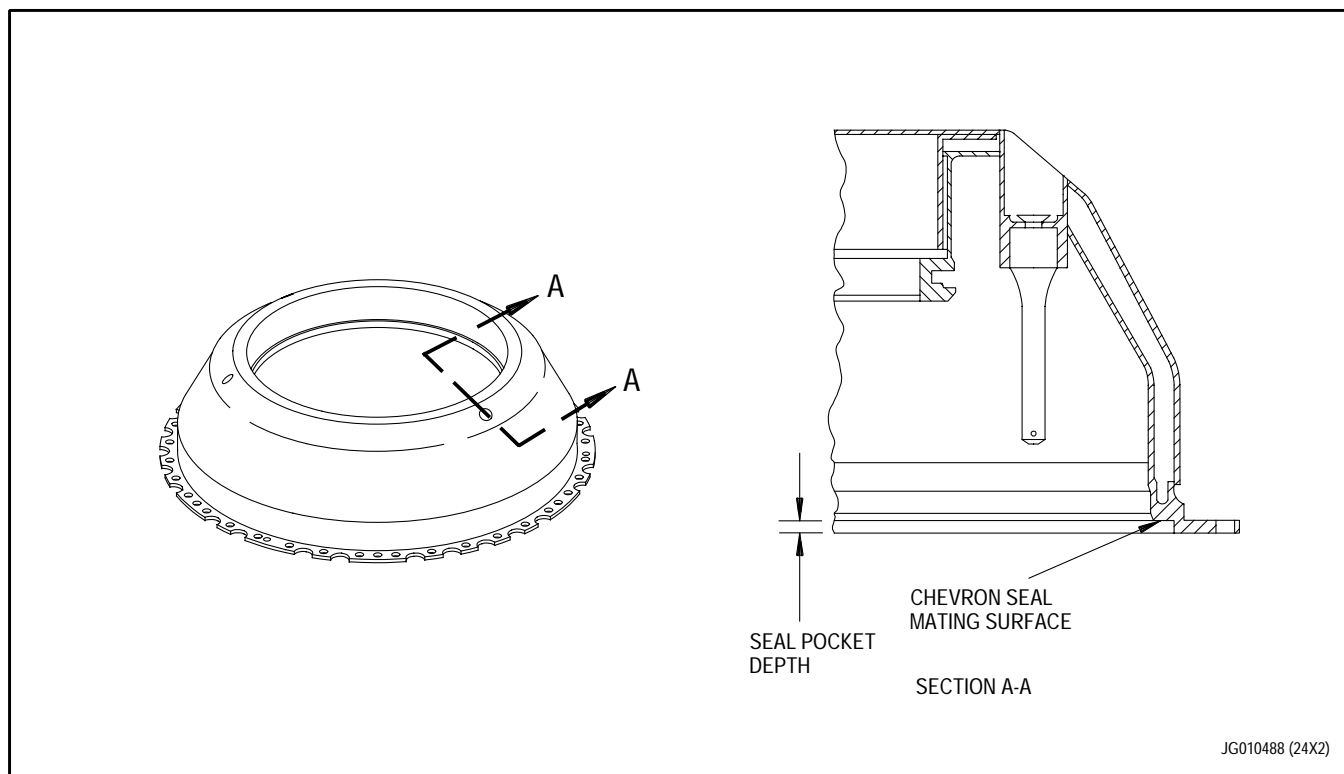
No. 4 Bearing Seal Rear Support Assembly - Chevron Seal Mating Surface Repair
